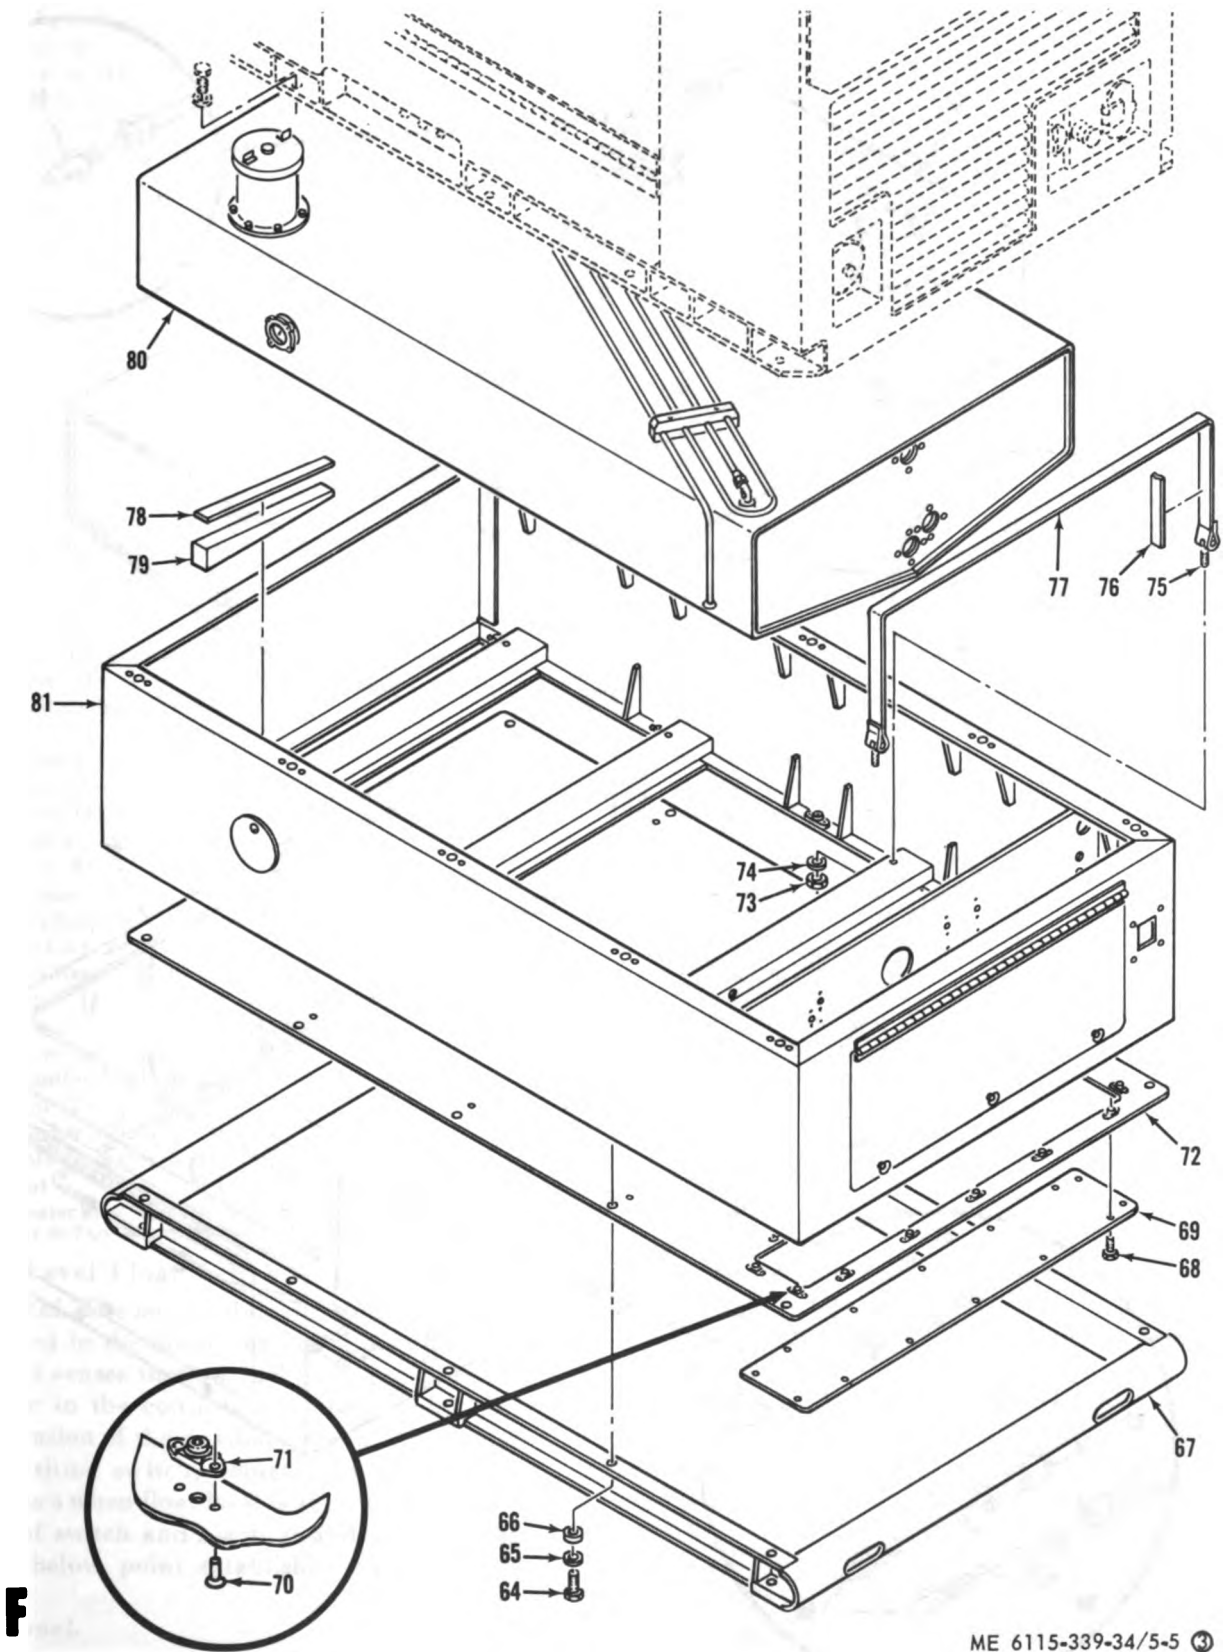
Fuel supply system accessories removal and installation. (Sheet 3 of 4).
